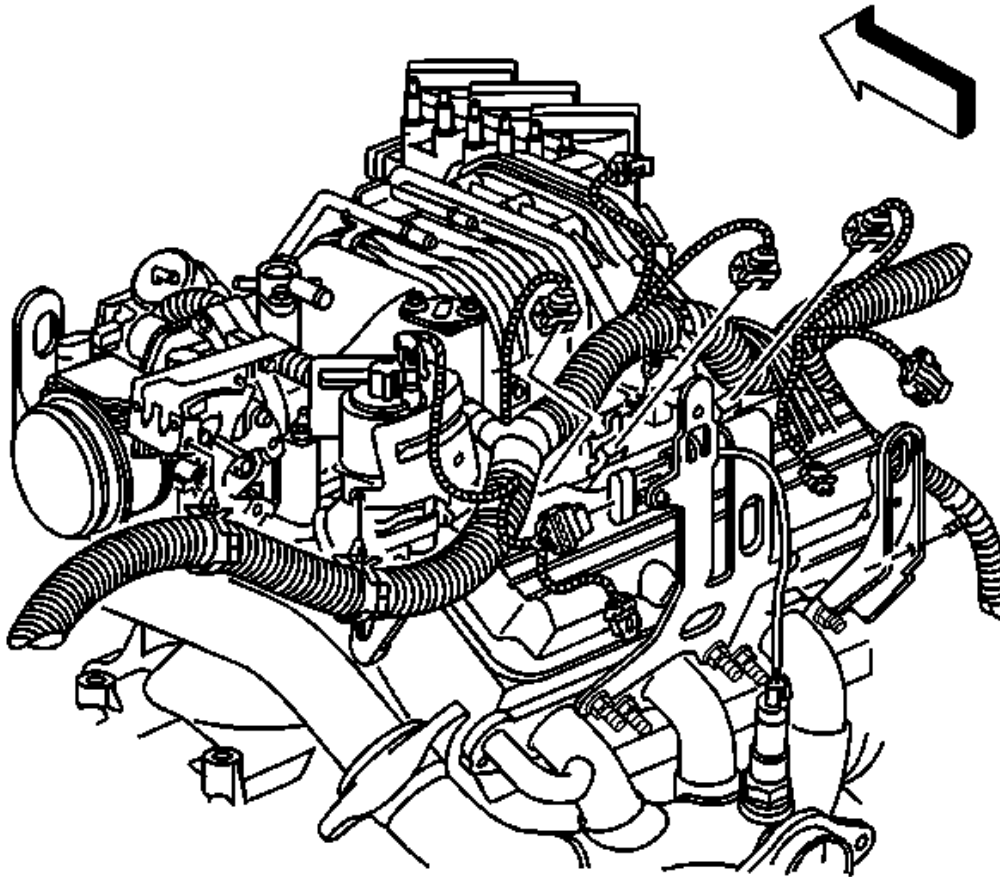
View of Wiring Harness Connectors from Right Side of Engine Components
